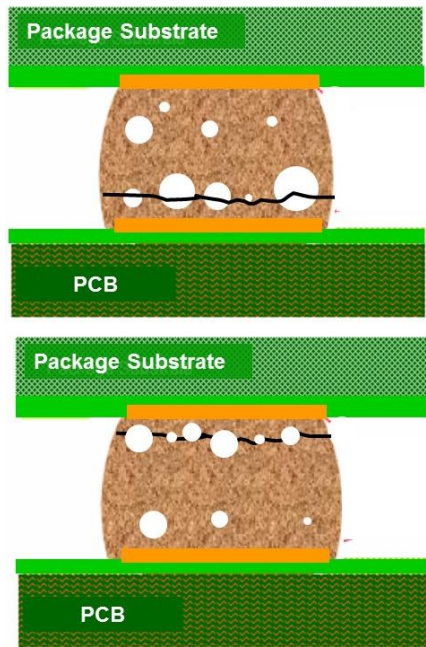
Illustrations of void-assisted cracking at the PCB side (above) and package side (below) of the solder joints.
